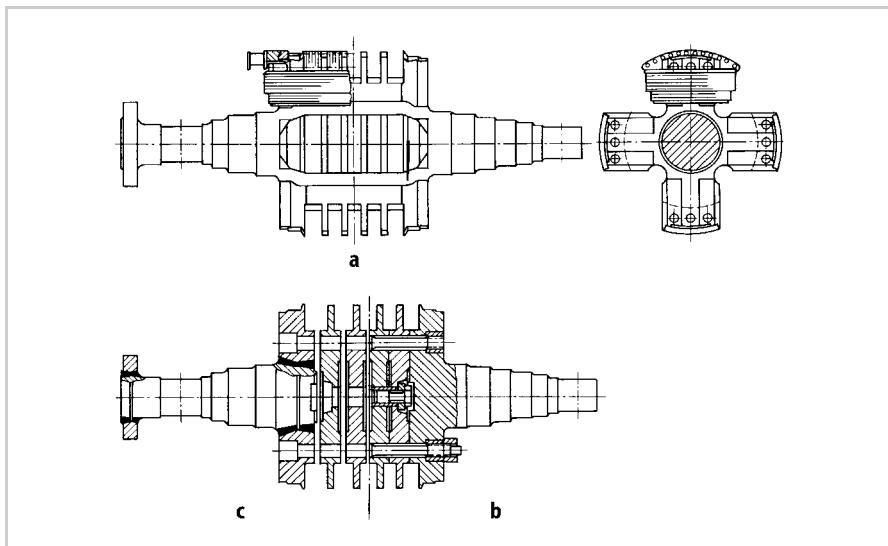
Rotor of a synchronous generator, after [7.8] (AEG-Telefunken): a as a forged part; b as a disc construction with forged flanges; c as for b but with welded flanges
